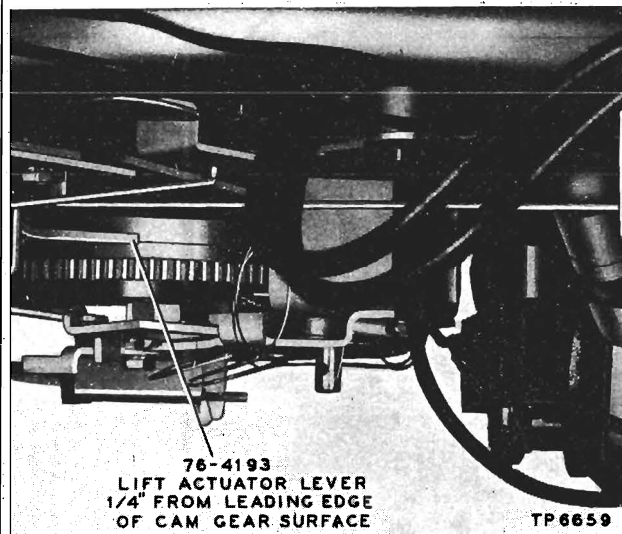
Tone-Arm Vertical Timing Adjustment, Showing Lower Actuator Lever in Contact with Cam Gear
